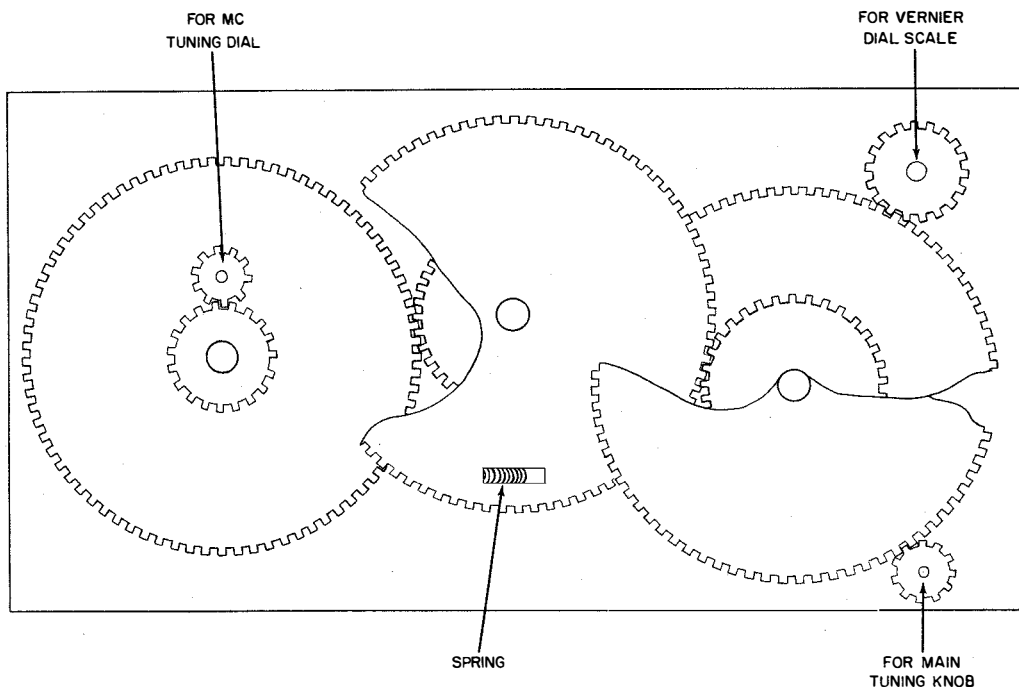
Radio Receiving Equipment Navy Model RBK-16, Cutaway View of Tuning Gears.
